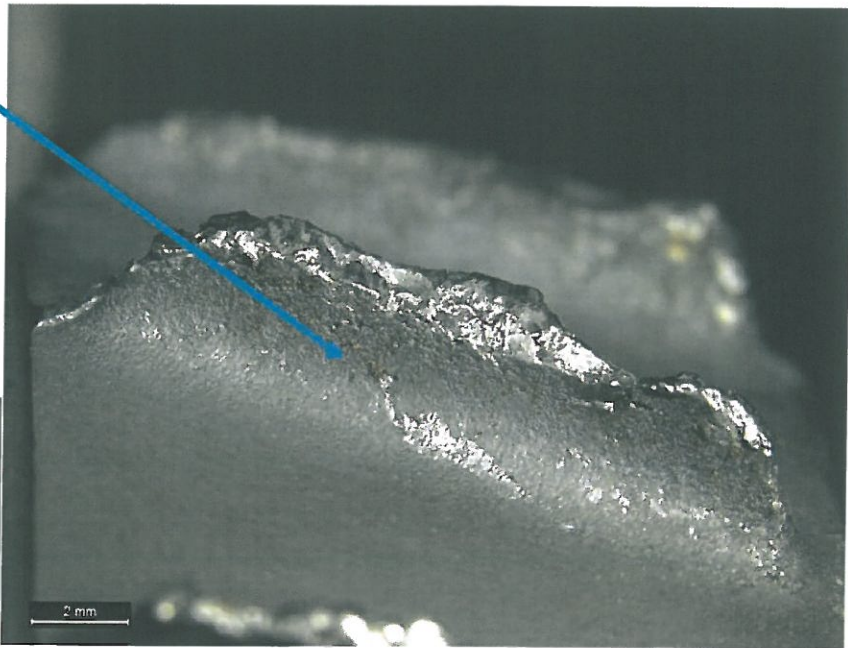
Stage 1 damaged blades (photo ATSB)
